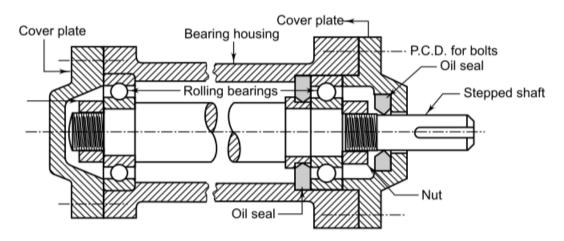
Mounting of Ball Bearings in a Housing with Seals
